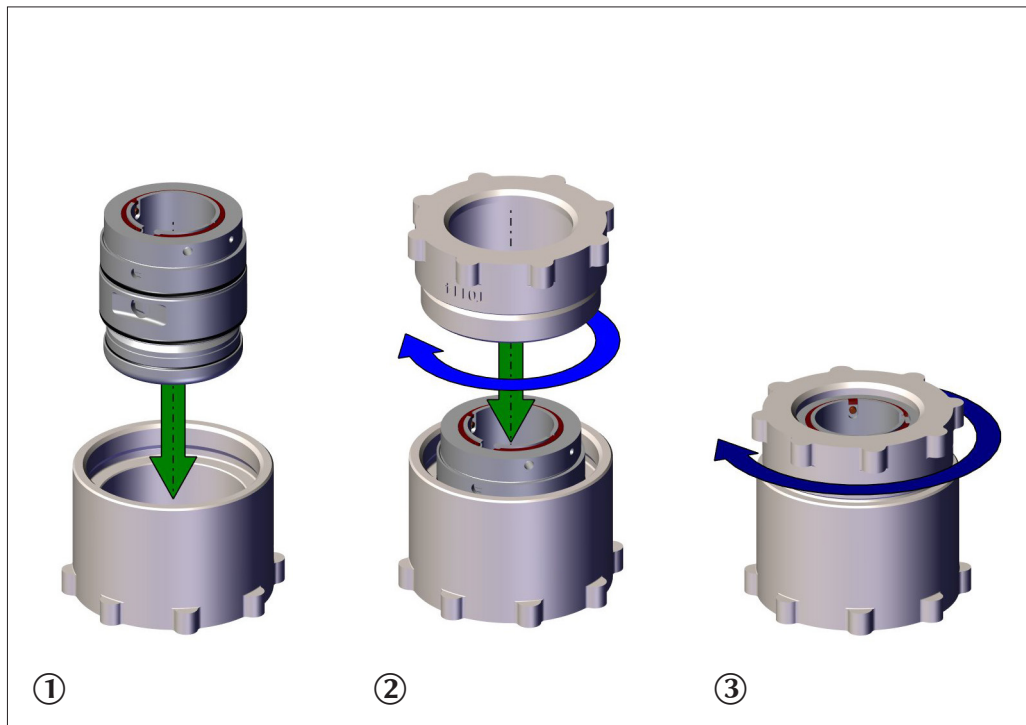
Using the assembly aid to dismantle a mechanical seal cartridge
